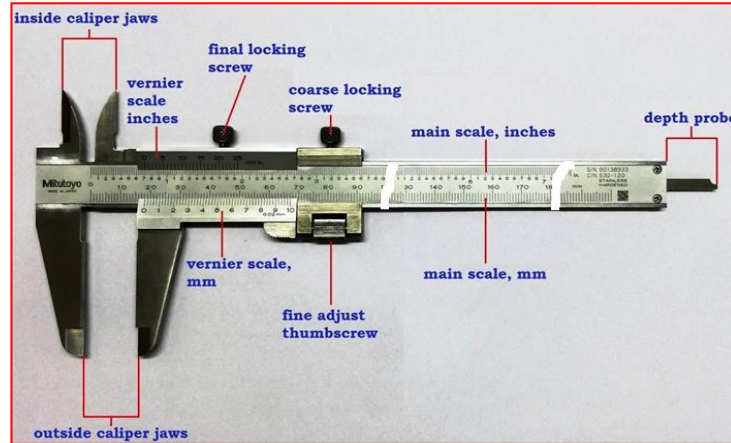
The parts of a vernier calliper is shown labelled in figure above.
